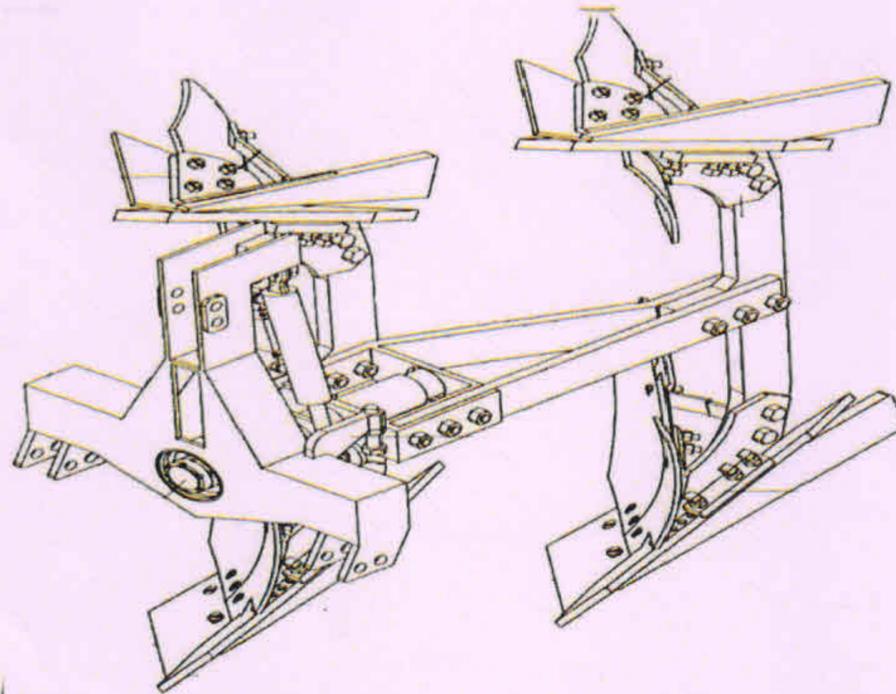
Schematic view of 2-bottom hydraulic reversible mould board plough
